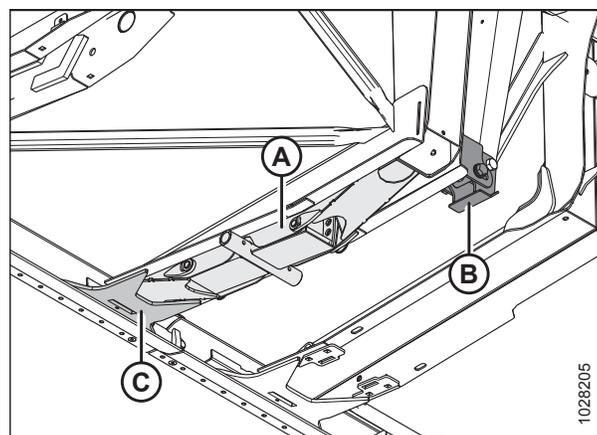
Inboard Arm Assembly Installed in Left Header Leg – View from Below
